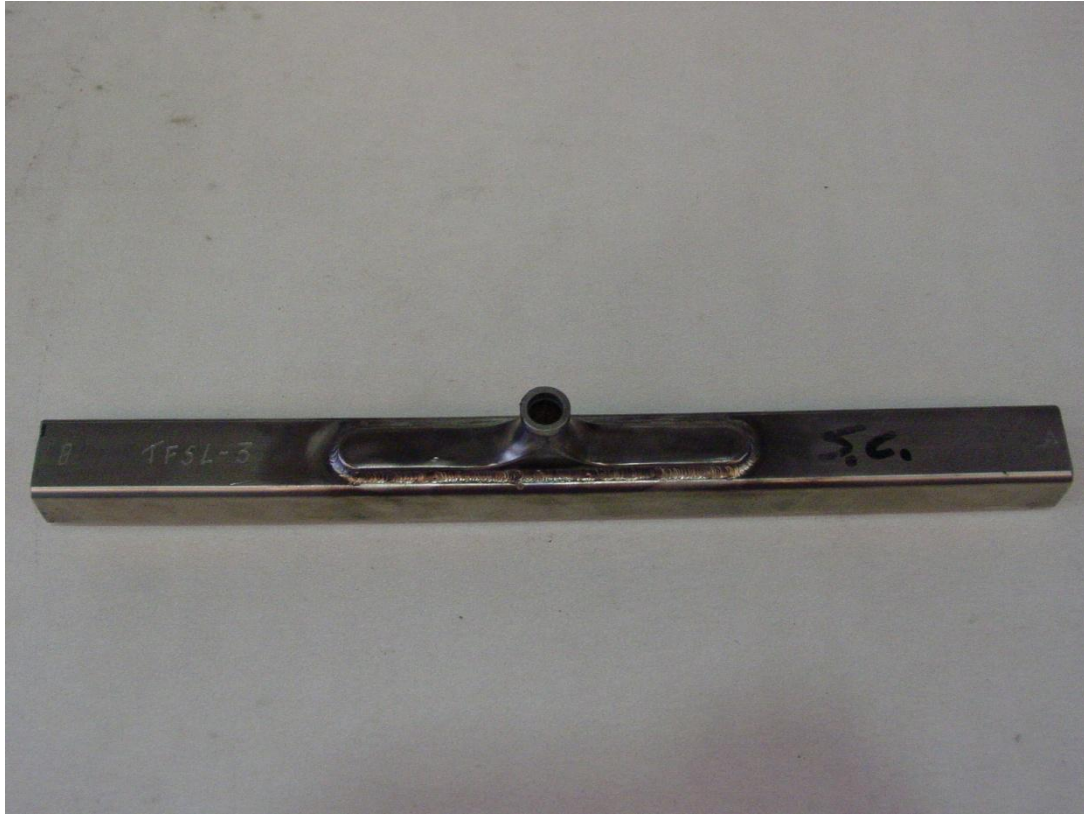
He inlet insert welded on JT-60SA TF jacket
